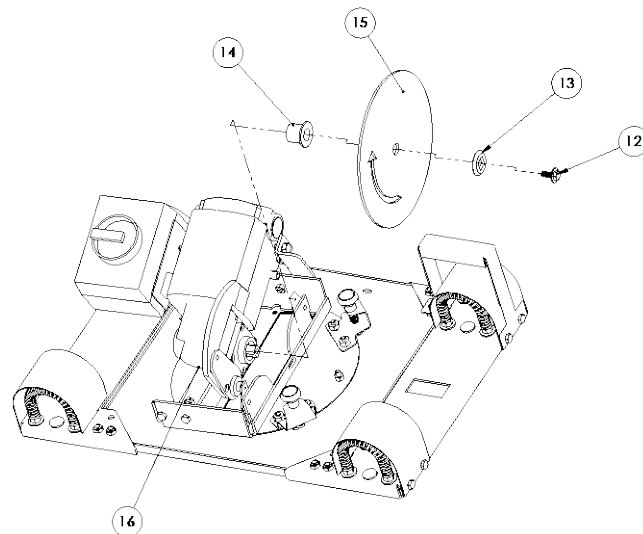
Installing a Saw Blade (6400 & 6800 Series Shown)
